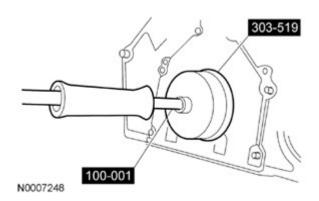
Removing Crankshaft Rear Seal Using Special Tools Courtesy of FORD MOTOR CO.
